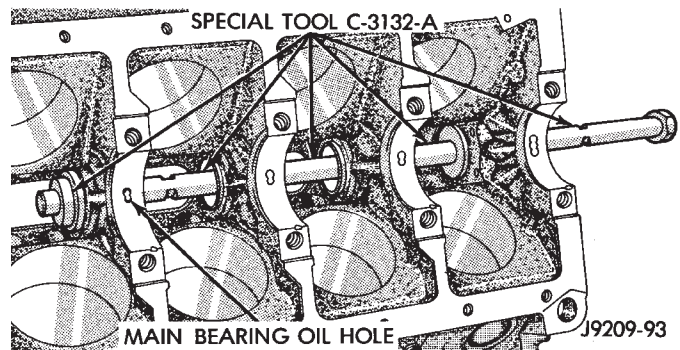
Camshaft Bearings Removal/Installation with Tool C-3132-A
